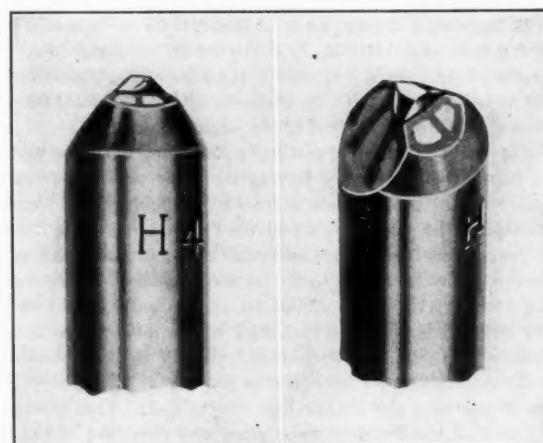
TOP AND PERSPECTIVE VIEWS OF REGULAR BORING TOOL
